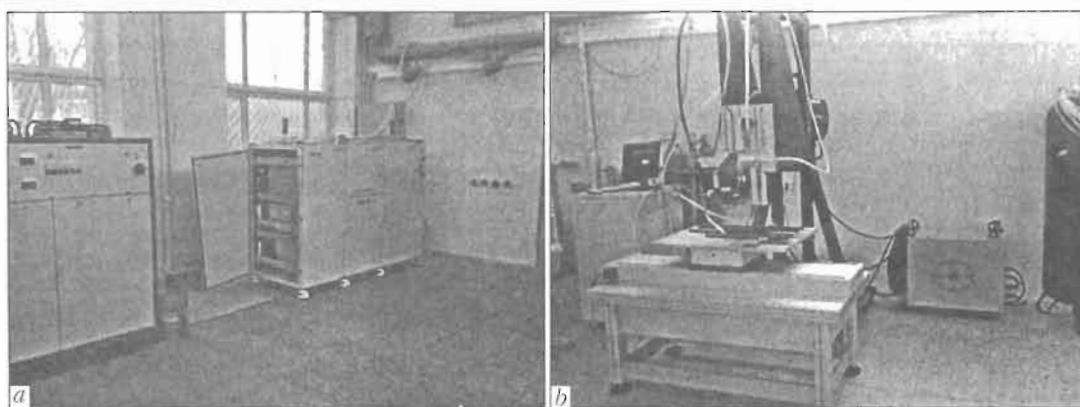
Installation for hybrid laser-arc welding: *a* — fiber laser LS-15; *b* — two-coordinate product manipulator, hybrid head with the manipulator, arc source, feed device, and control unit.
